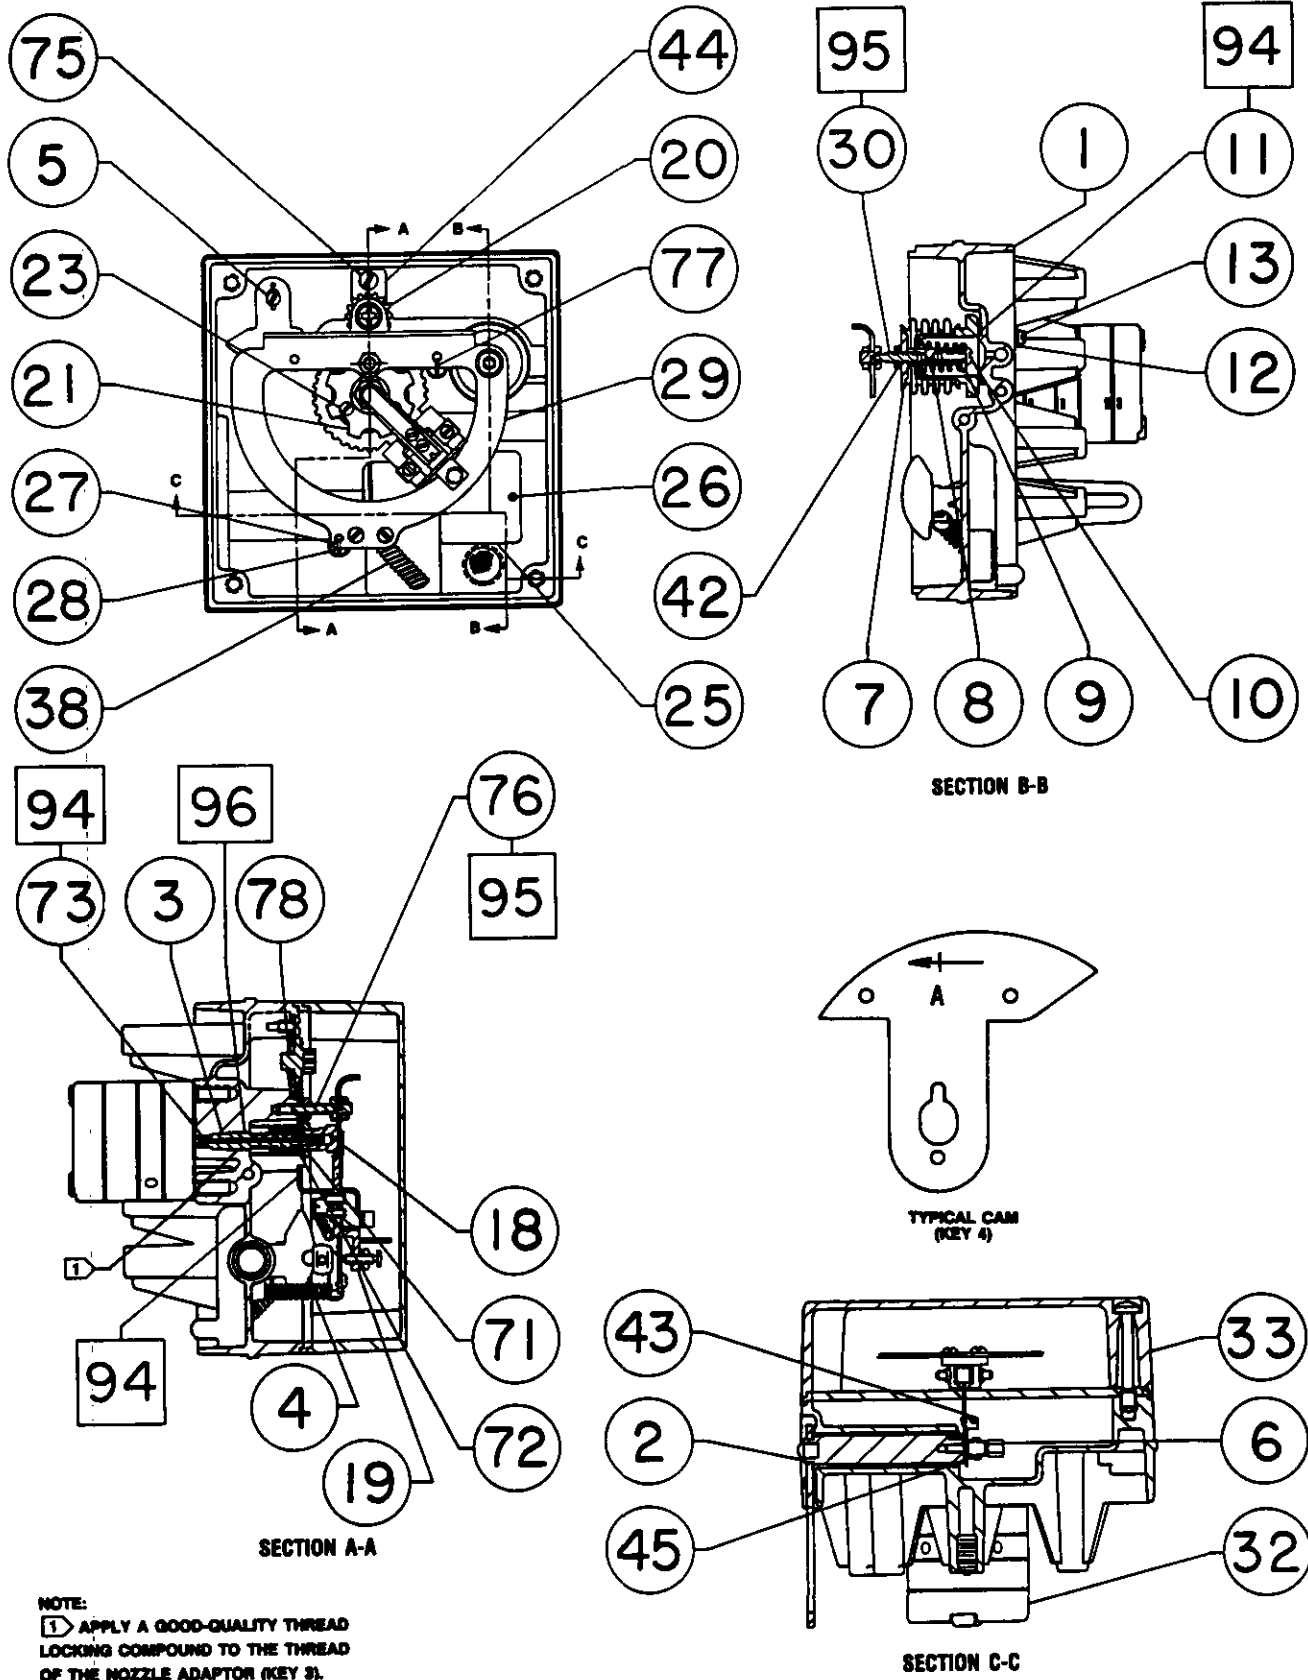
3582 and 3583 Series Positioners and Transmitters Assembly Drawing
